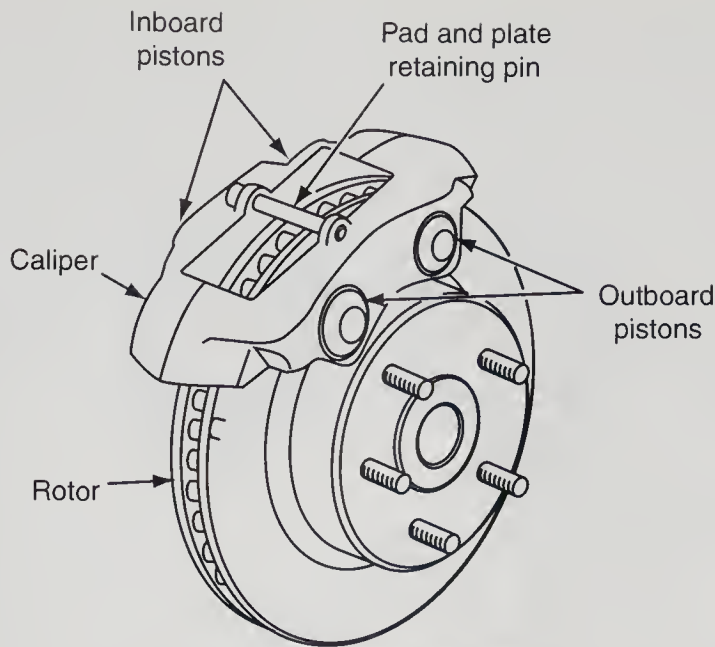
A fixed caliper is mounted rigidly over the rotor and has one or two pistons on the inboard and outboard sides to apply the brake pad.
